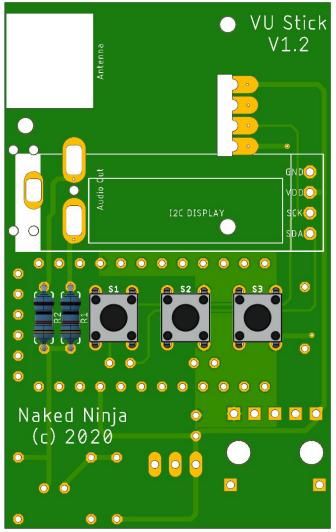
Front view of the VU Stick V1.2 PCB with resistor R1 and R2 placed and soldered.
